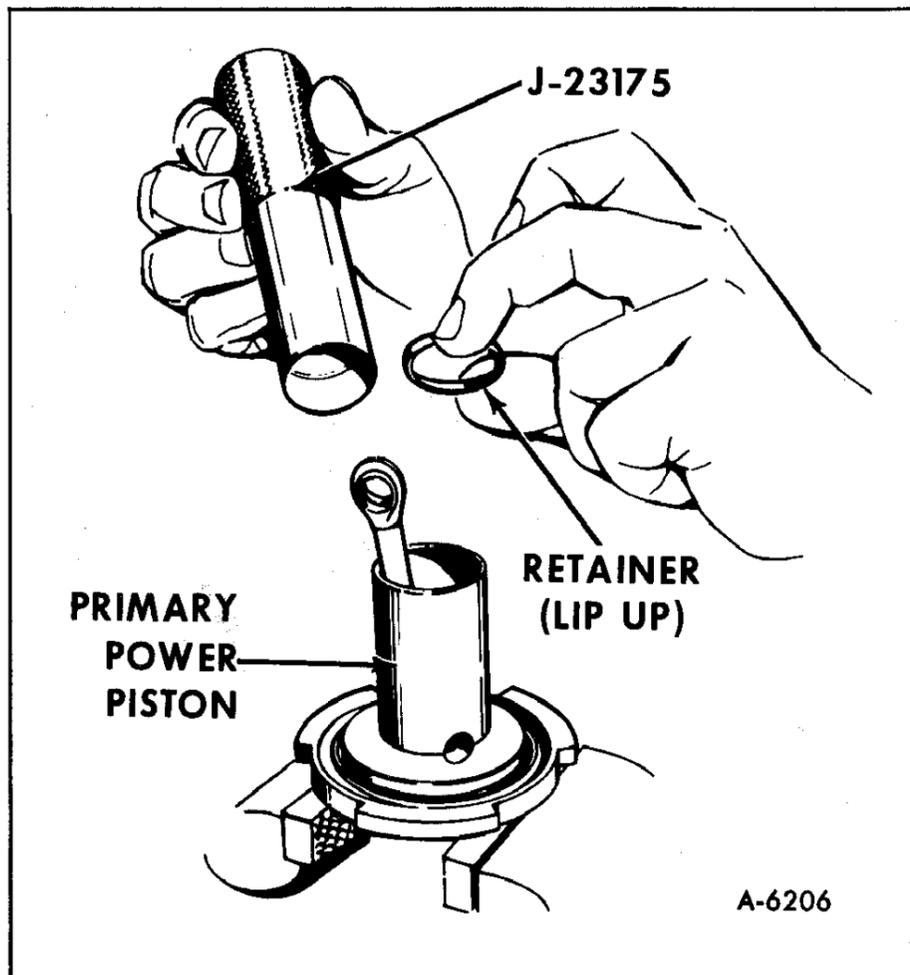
Installing Floating Control Valve Retainer with Installer J-23175
